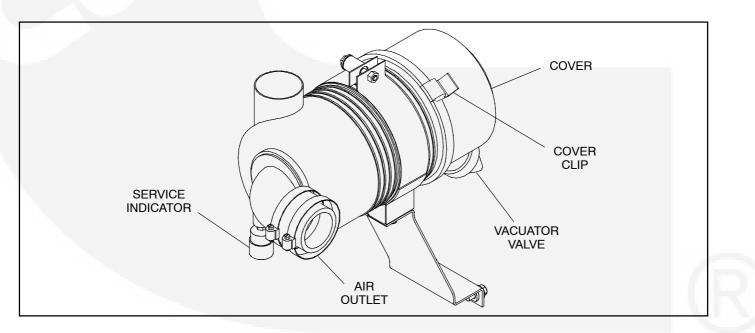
HEAVY DUTY AIR CLEANER
